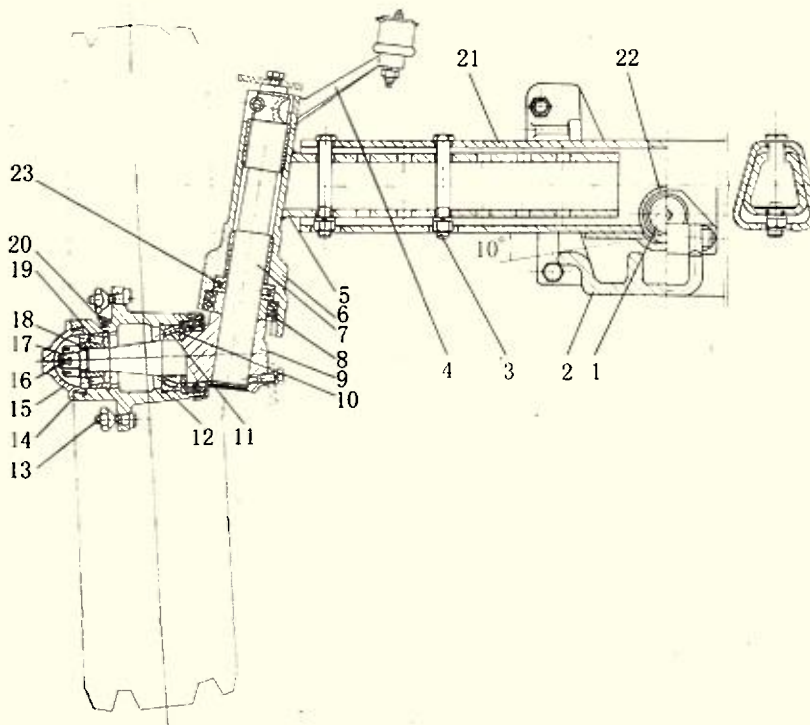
1 Structure of Jiangsu - 500 tractor front axle
